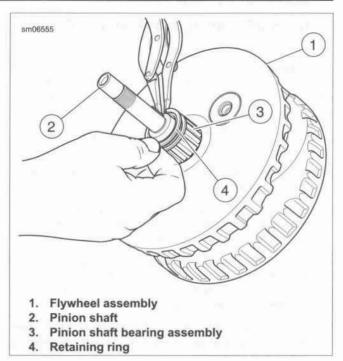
Removing Pinion Shaft Bearing Retaining Ring
